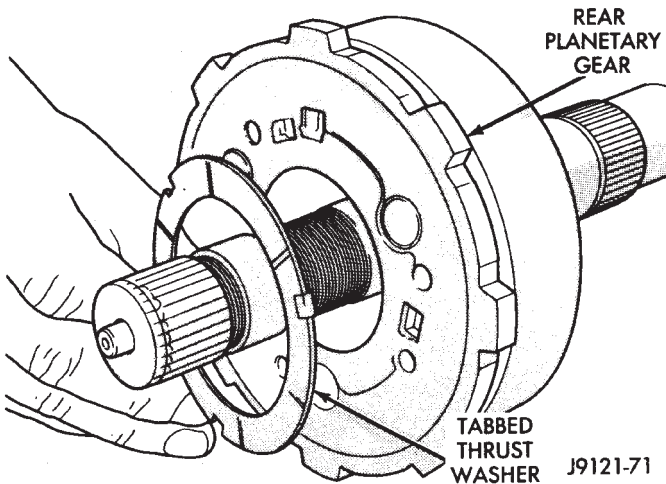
Installing Rear Planetary Thrust Washer—46RH
